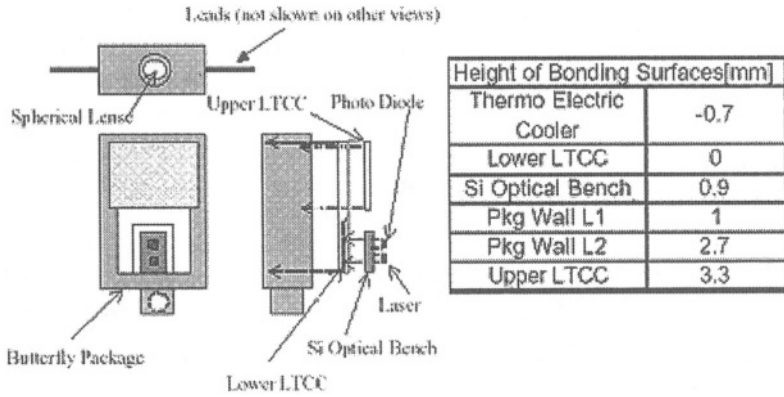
Butterfly package with height of bonding surfaces [N-1]
